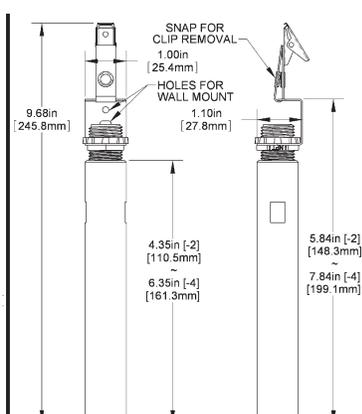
BB2, 1" Buffer w/plastic Threaded Fitting
